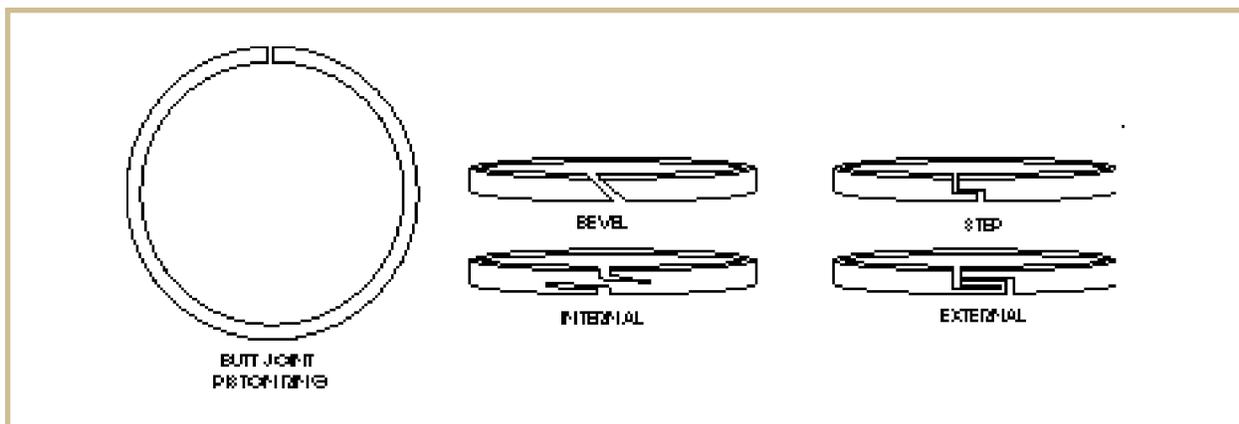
You'll encounter different seal designs when servicing hydraulic systems. Seals should be replaced whenever the component is disassembled for service or cleaning.
